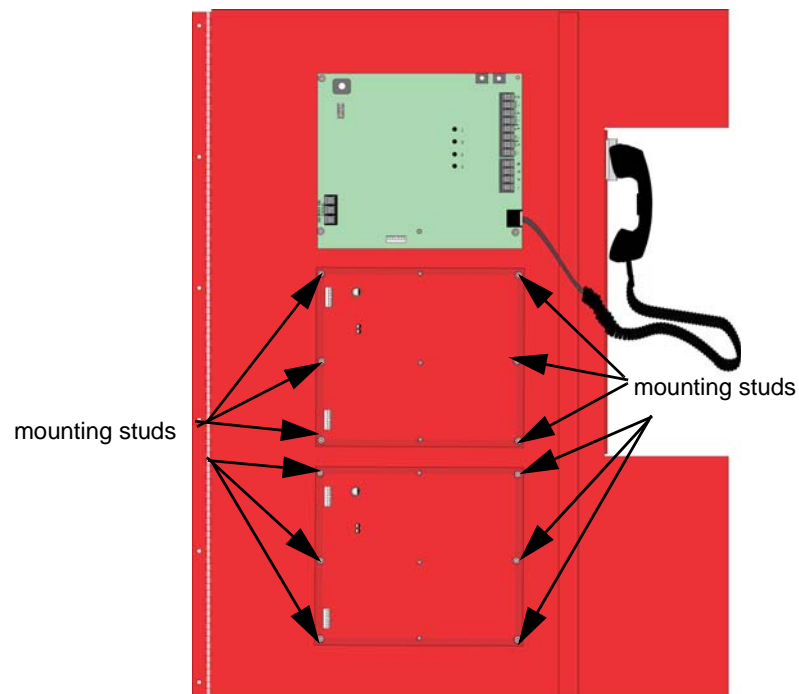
Mounting Locations for the TR-24Z-EXT
